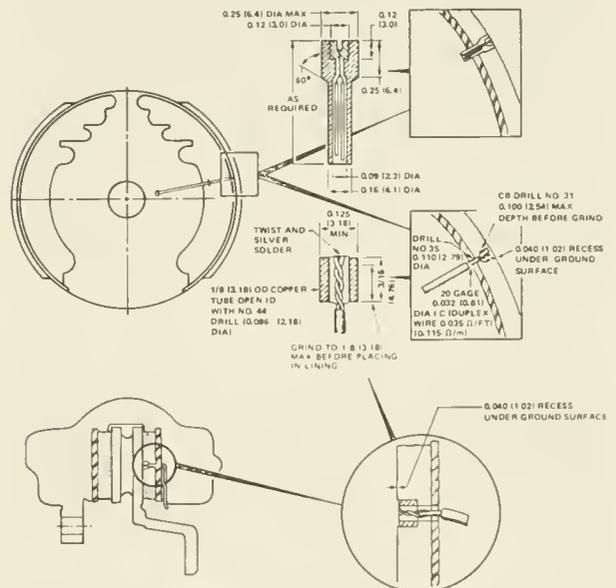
TYPICAL PLUG THERMOCOUPLE INSTALLATIONS
